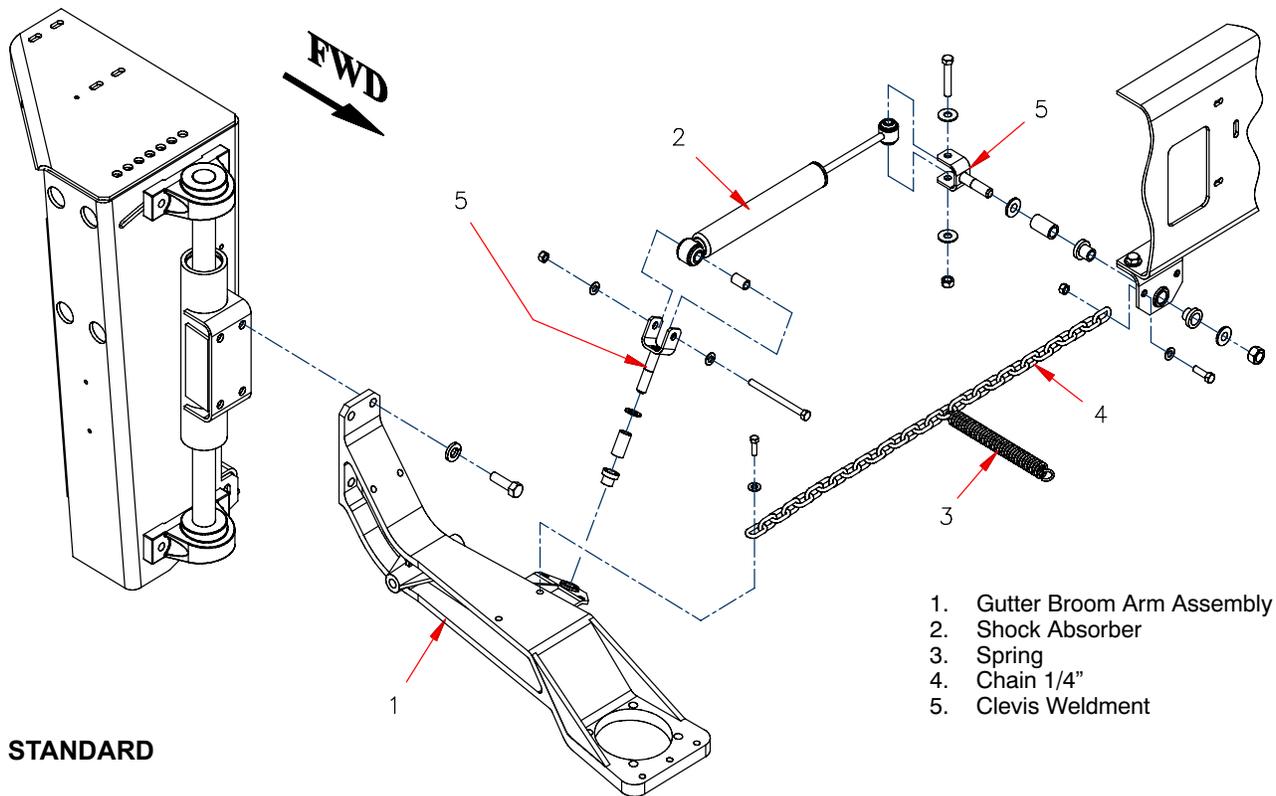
A The gutter broom arm shock absorber mounts to the gutter broom arm and to the frame. A jack may be required when working on the gutter broom arm assembly to relieve the spring tension.
